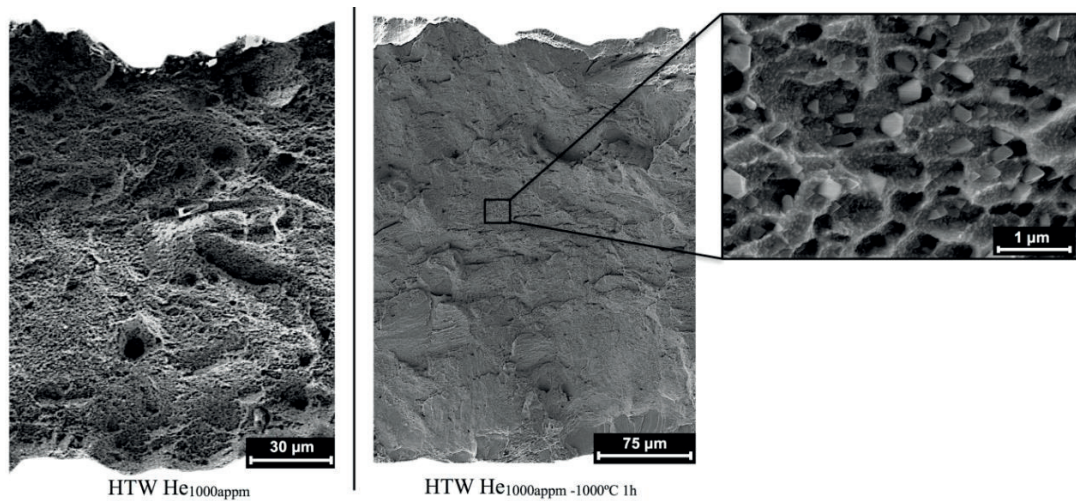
Excerpt of fracture surface of the samples tested with 1000 appm in HTW with/out PIA. A detail of the fracture surface is given for the heat-treated sample.
